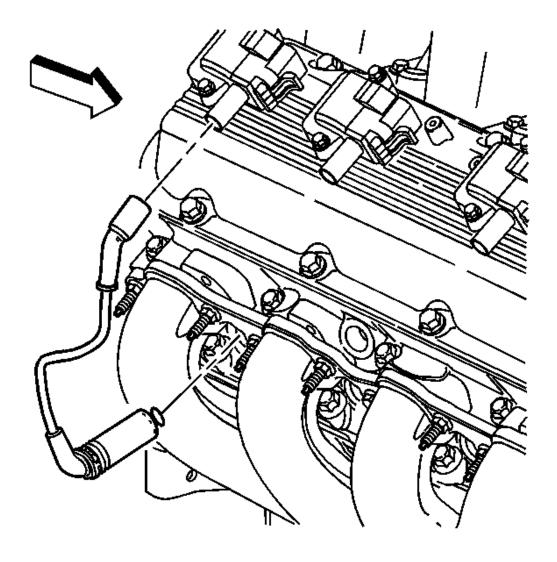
View Of Spark Plug Wires (Right) Courtesy of GENERAL MOTORS CORP.
